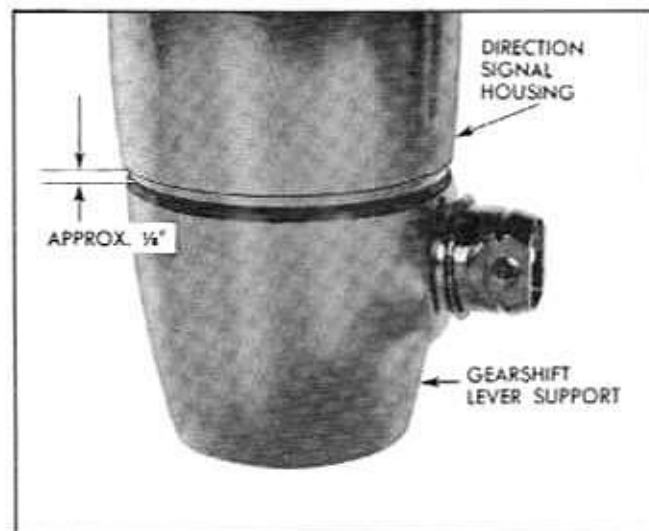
Clearance Between Lever Support and Directional Signal Housing
